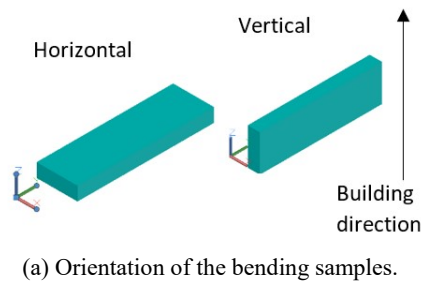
Fabrication of tensile and bending samples, printed horizontally and on edge.
